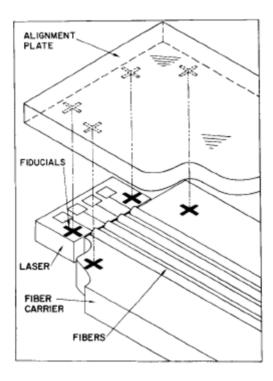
Shows a laser chip, fibre carrier and capping chip allowing passive alignment [27]
